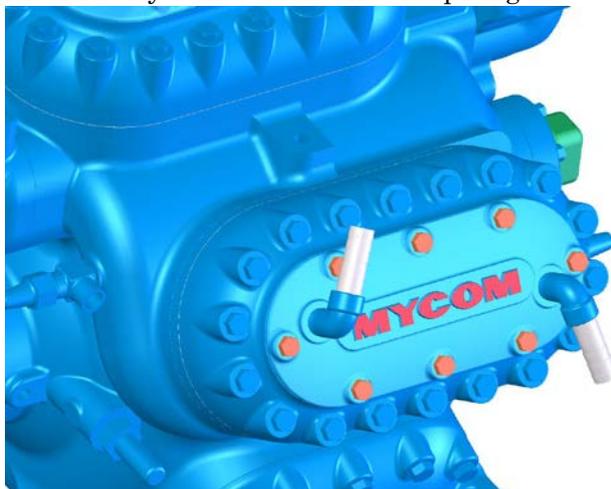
Head Cover, Water-cooled type (P/N50)
